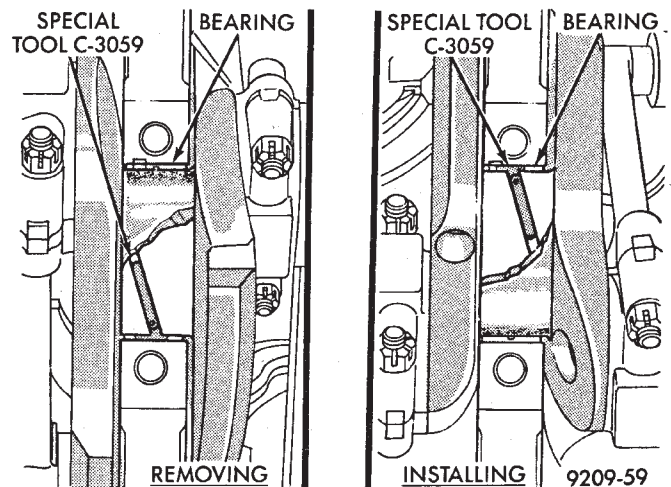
Upper Main Bearing Removal and Installation with Tool C-3059
